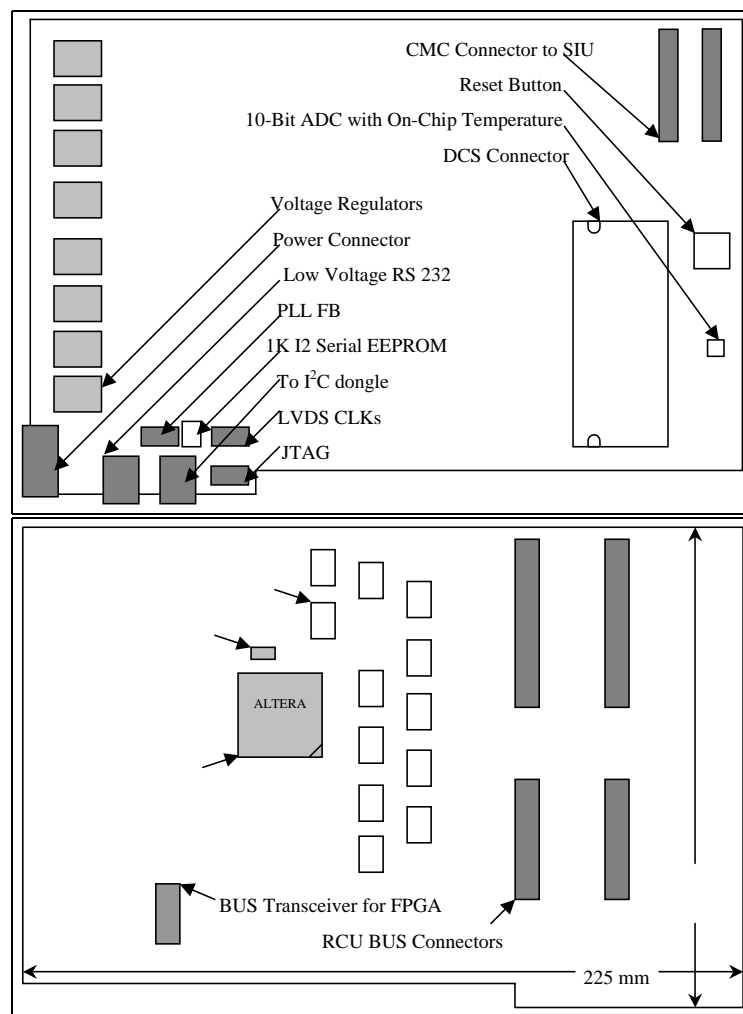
Component placement on the RCU3 PCB top side (top) and bottom side (bottom).
